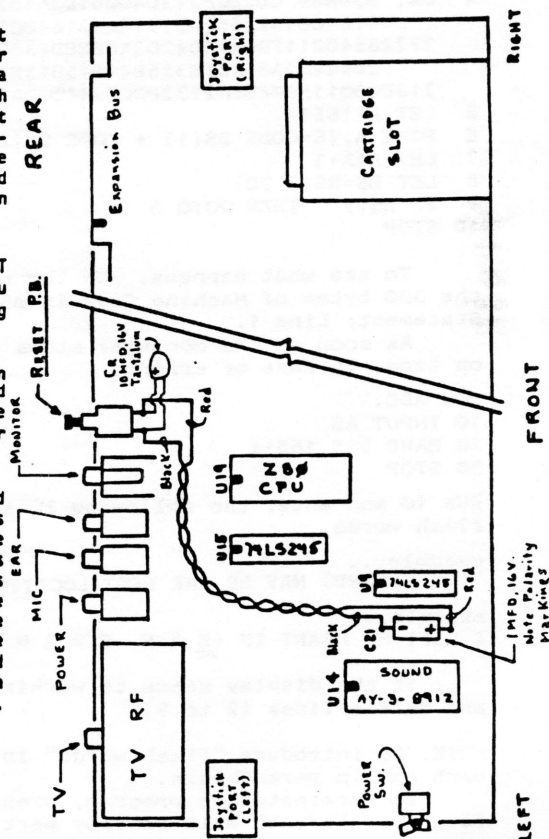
2068 COMPONENT LAYOUT, TOP VIEW
